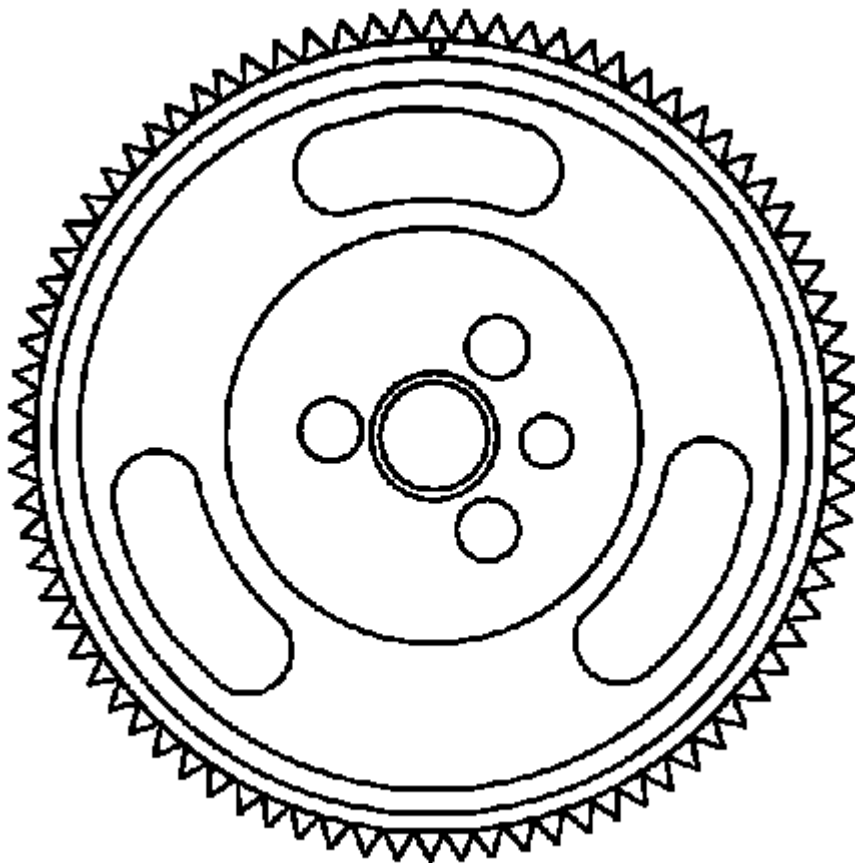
Identifying Balance Shaft Drive Gear Camshaft Timing Mark
